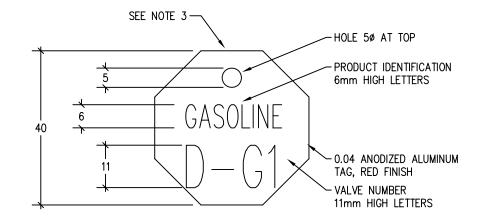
VALVE TAGS FOR GASOLINE SYSTEM
